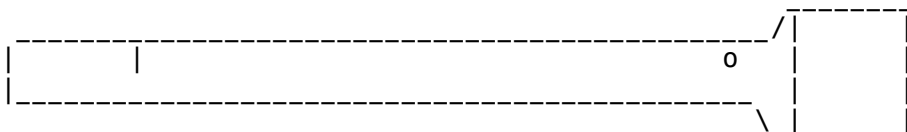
pipe with one end flattened and fuse hole drilled (top view)
